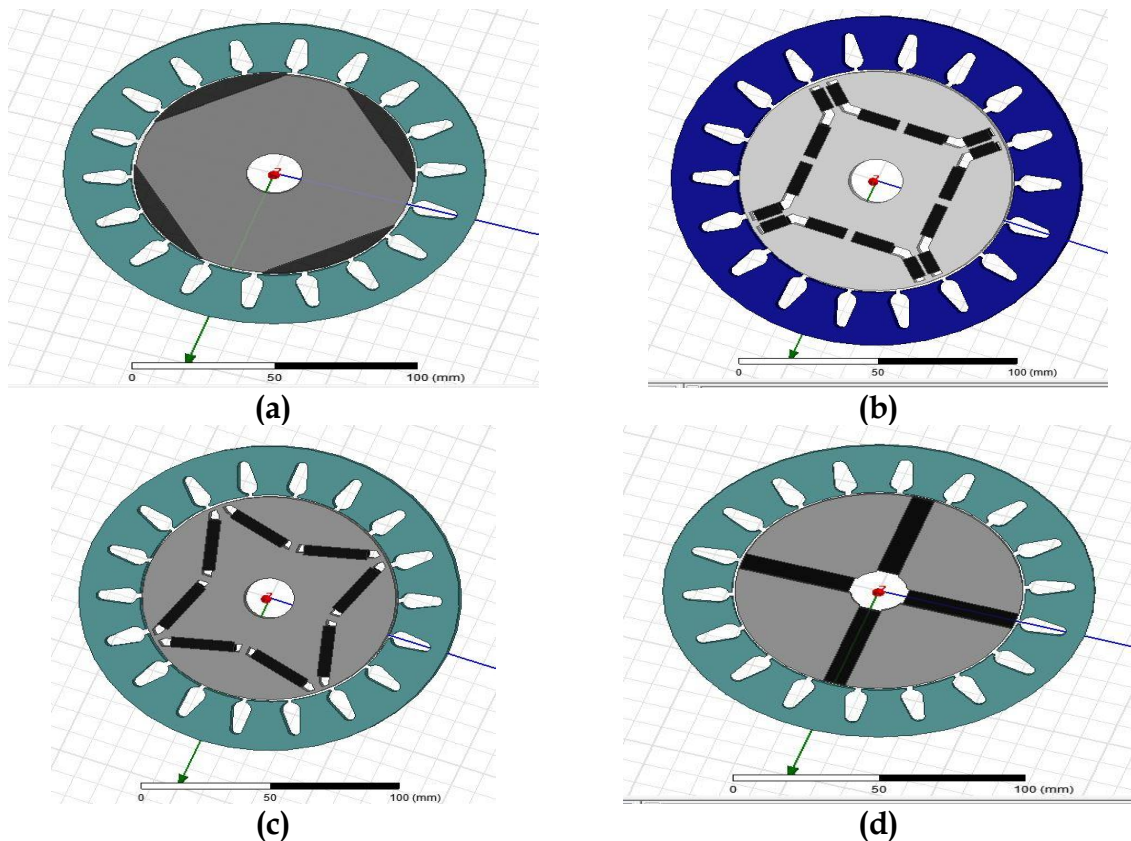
Different types of IPM motors, (a) Surface permanent magnet motor, (b) Embedded IPM motor, (c) V shape magnet embedded IPM motor, (d) Inserted IPM motor.
